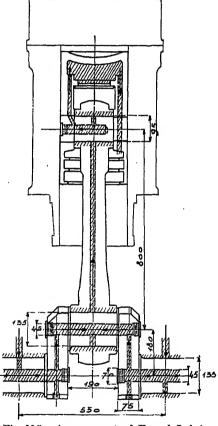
Arrangement of Forced Lubrication of Crank Shaft and Gudgeon Pin, and Oil Cooling of Piston Crown (M.A.N.).
